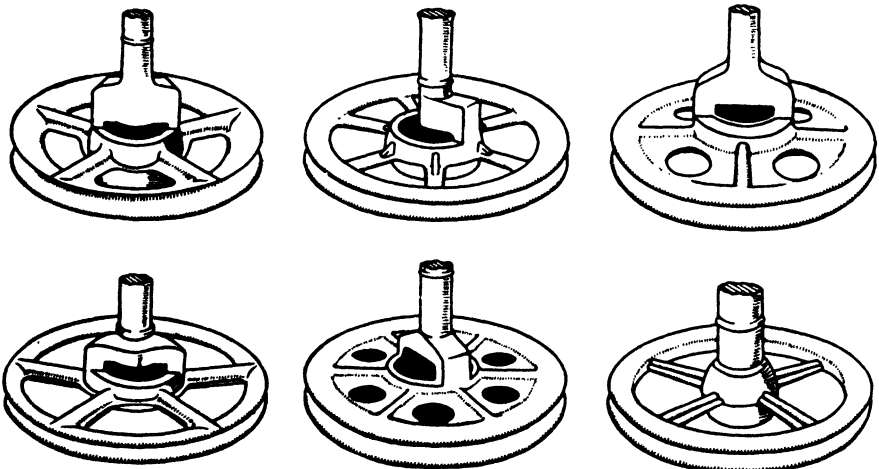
Sheave-wheel castings, semicentrifugal type. (Johnson.⁽³³⁾)
